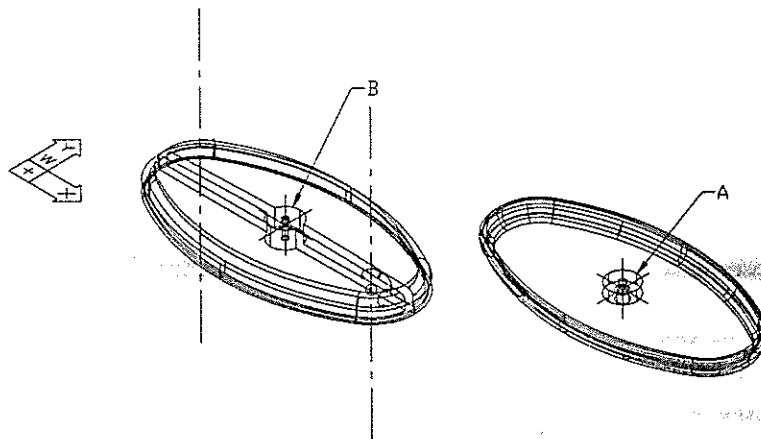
Assembly not updated automatically after application of assembly constraint
